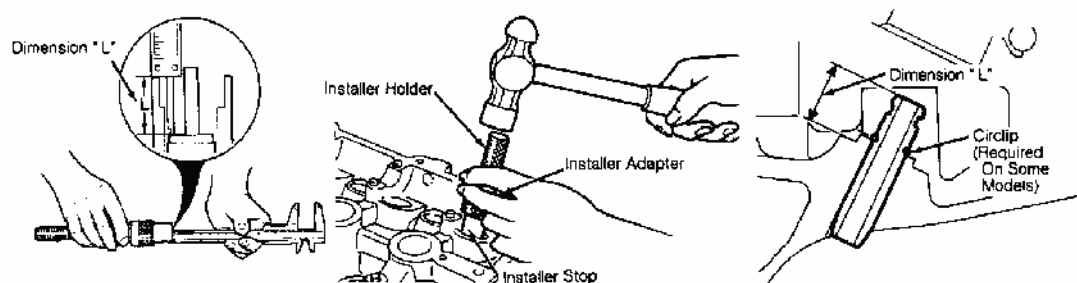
Adjusting Valve Guide Installer & Installing Guide
